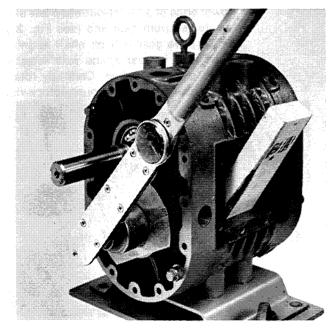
TIGHTENING LOCK NUTS WITH TORQUE WRENCH
